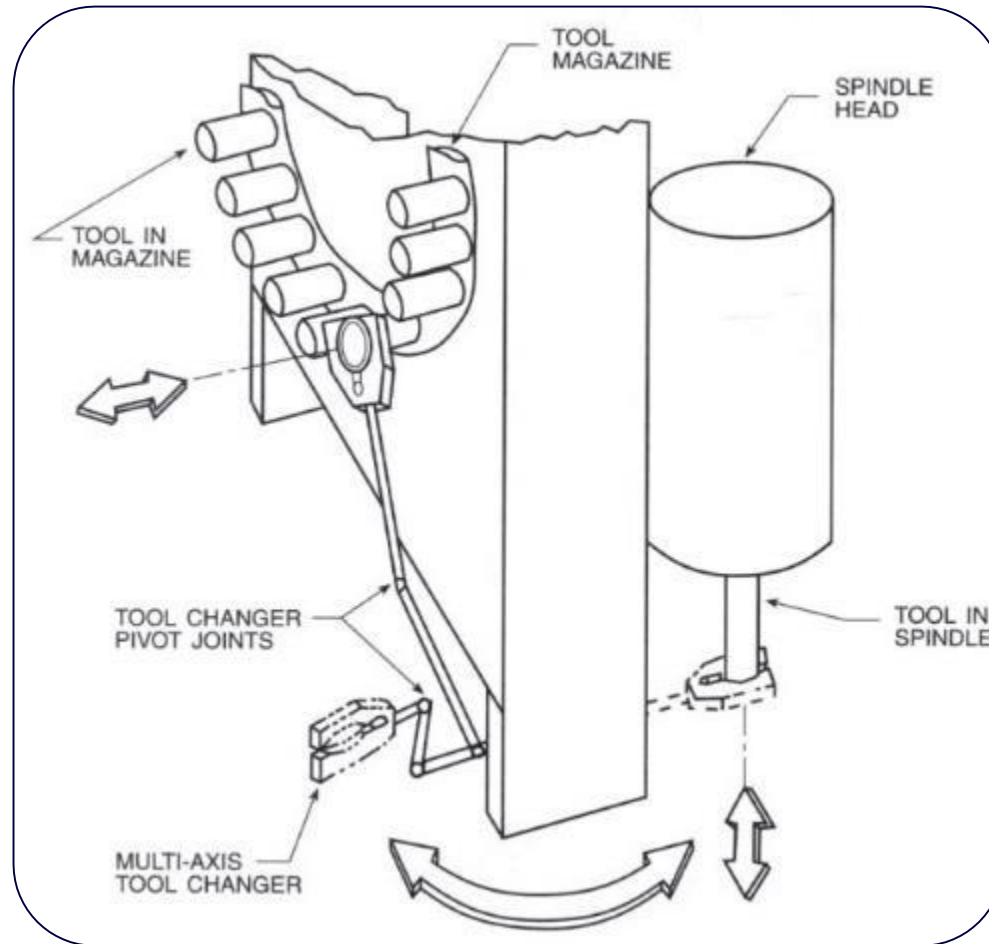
8-station tool changer on a horizontal machining center
